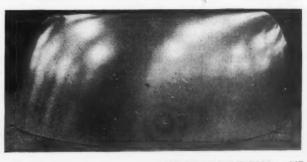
The New Single-Piece Skin for the B-17 Engine is More Accurately Made and thus is Easily Assembled into the Mating Jig
